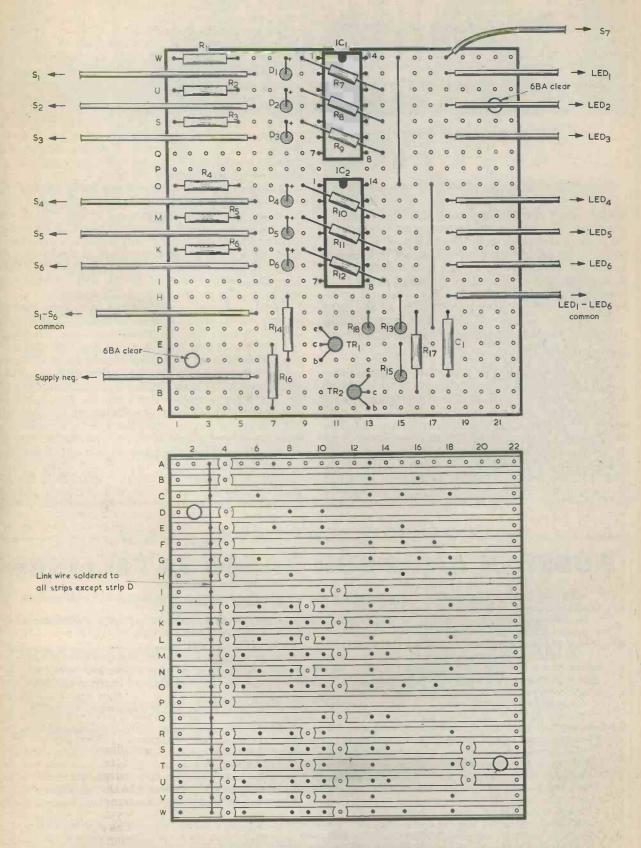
Layout of components on the Veroboard panel. There is a link wire on the copper side which is soldered to all the strips except strip D
